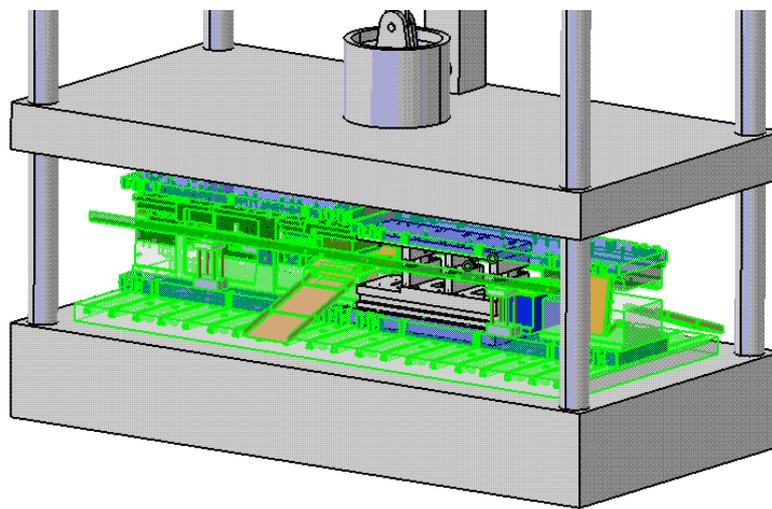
DMU kinematic-simulation of a sheet metal forming press and corresponding transfer equipment, visualized by CATIA V5 [SchMe06]
